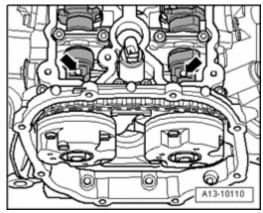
Identifying Threaded Holes In Camshafts Must Face Upward Courtesy of VOLKSWAGEN UNITED STATES, INC.
